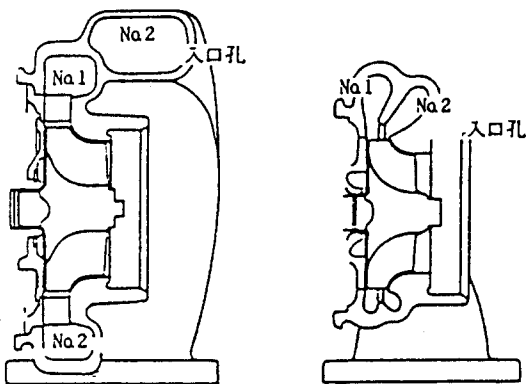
Sectional Drawing of Partial Inlet Radial Turbine
